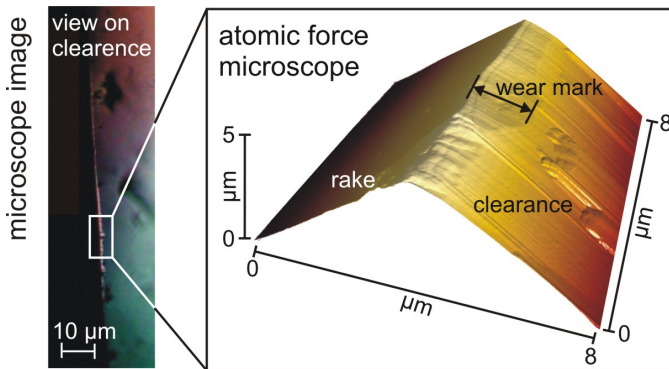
Microscope and AFM image of a diamond cutting tool after machining a nitrocarburized steel workpiece
